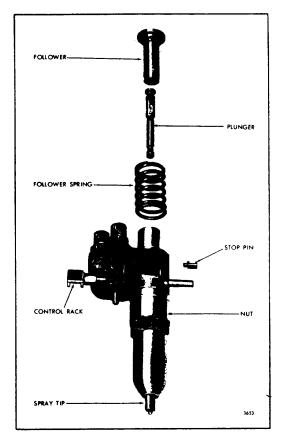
Injector Plunger, Follower and Relative Location of Parts
